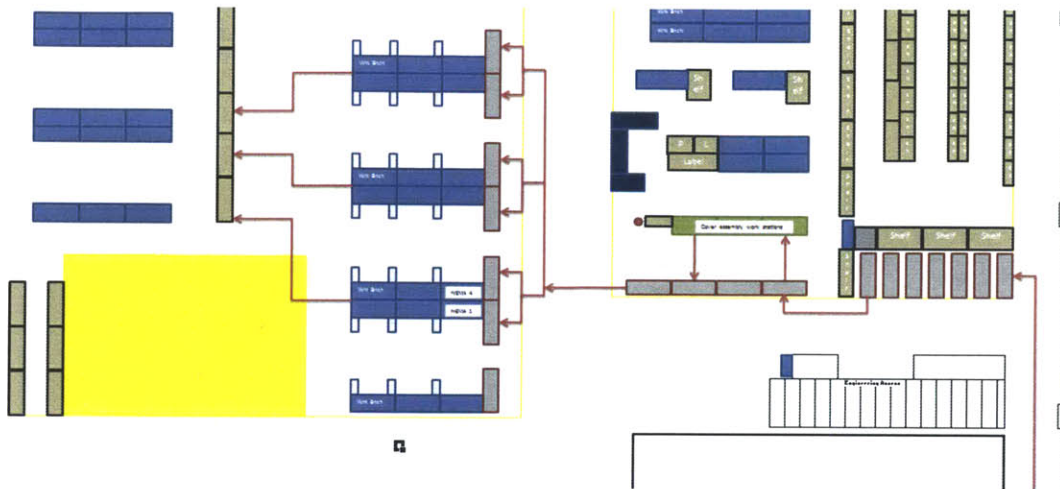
Floor plan of new cover build area after the Kaizen event[15]
